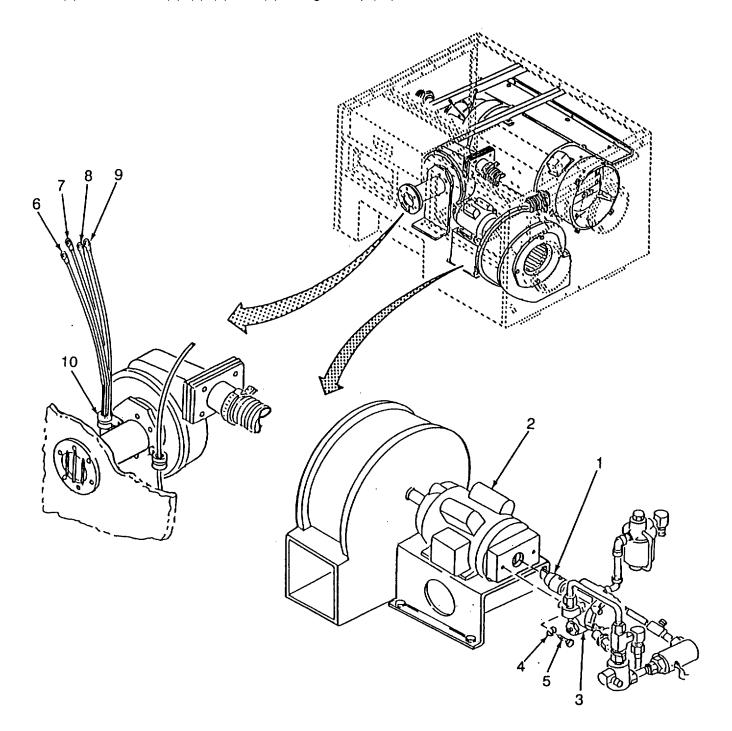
Fuel Pump and Solenoid Valve Installation (Sheet 1 of 2)
